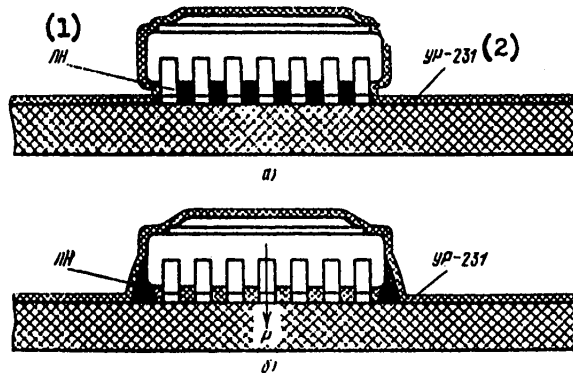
Example of proper (a) and improper (b) mounting of a planar housing on a printed circuit
